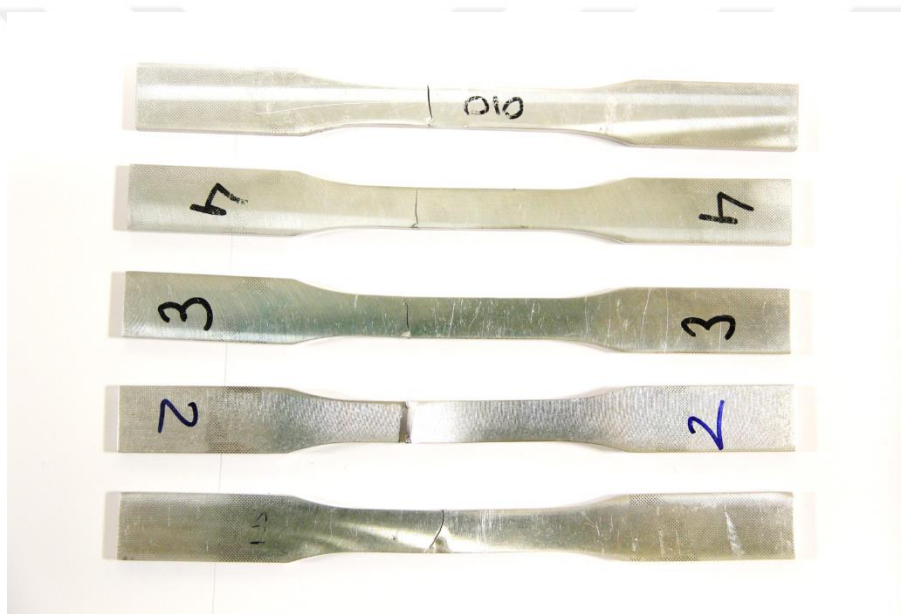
Specimens that have failed due to fretting fatigue (steel-aluminum contact)
